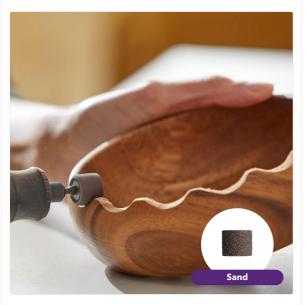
Sanding the edge of a wooden bowl with a Dremel rotary tool.
